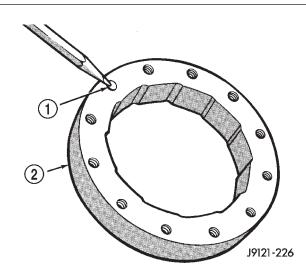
Location Of Non-Threaded Hole In Clutch Cam
